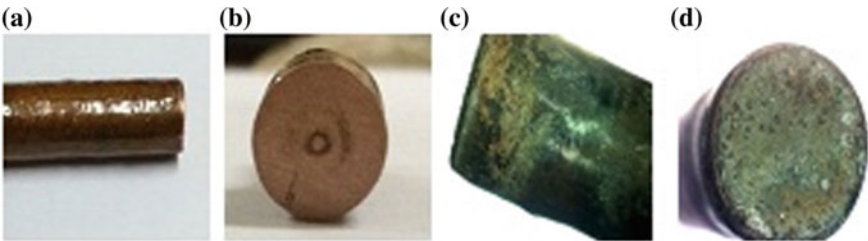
Surface of the ECT before machining (a, b) and after machining (c, d)
